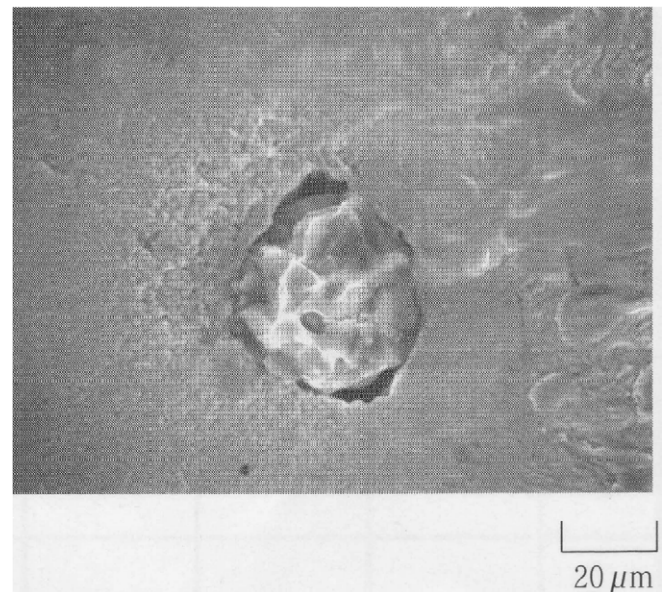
Initiation site of high-cycle-number fatigue. Al₂O₃ on the fracture surface of SUP 7 spring steel.
